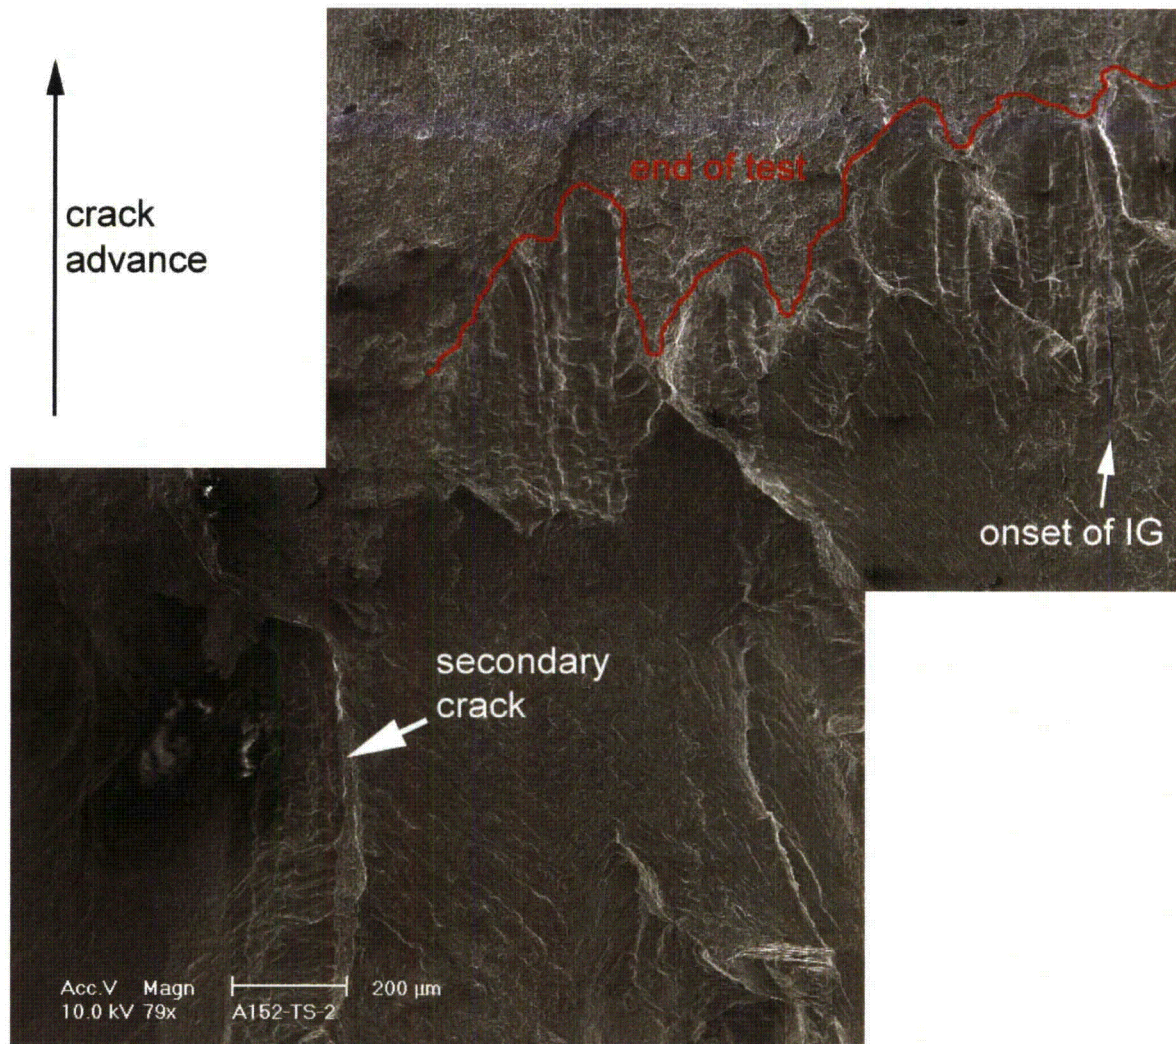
Region of fracture surface of specimen A152-TS-2. Crack advance is from bottom to top.
